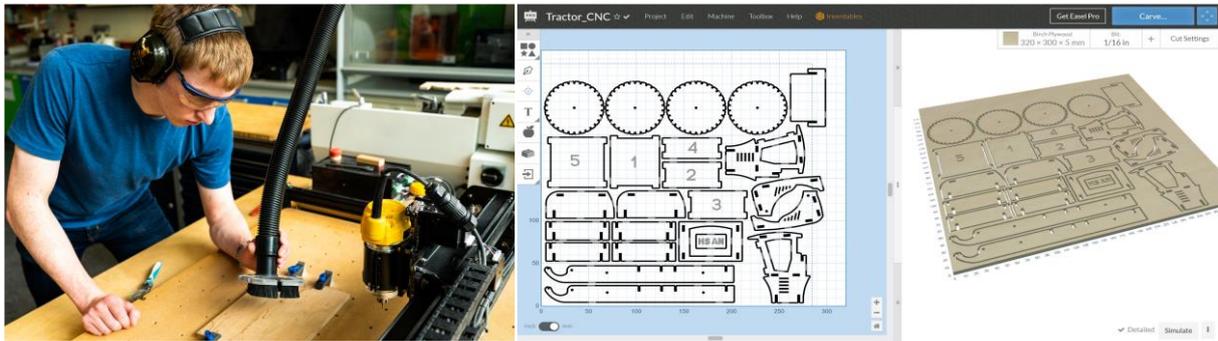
Student working with the CNC carving machine (left) and view of the browser-based software for the milling machine (right)
